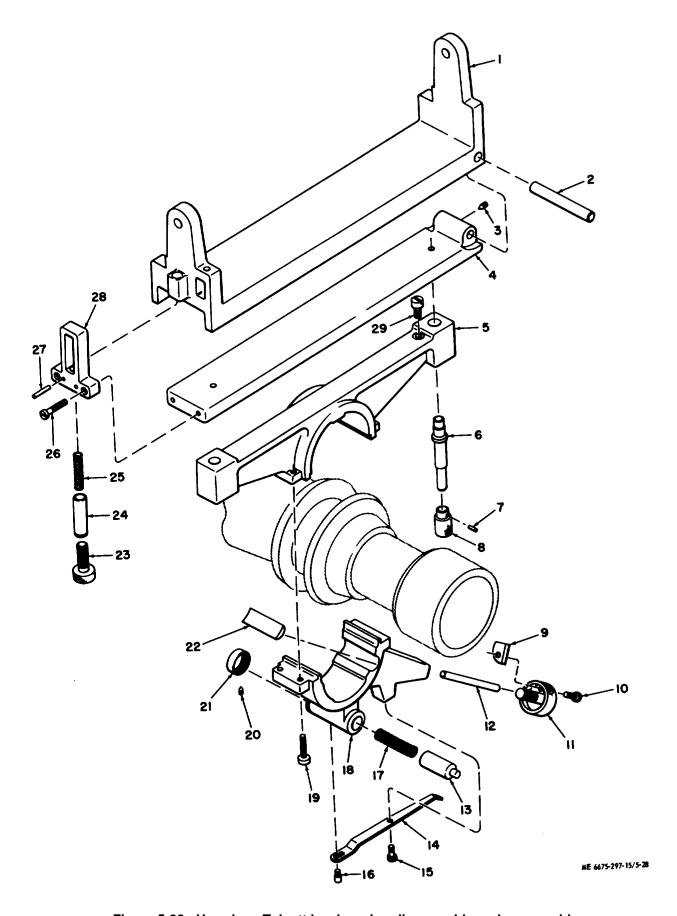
Horrebow-Talcott level carrier, disassembly and reassembly.
